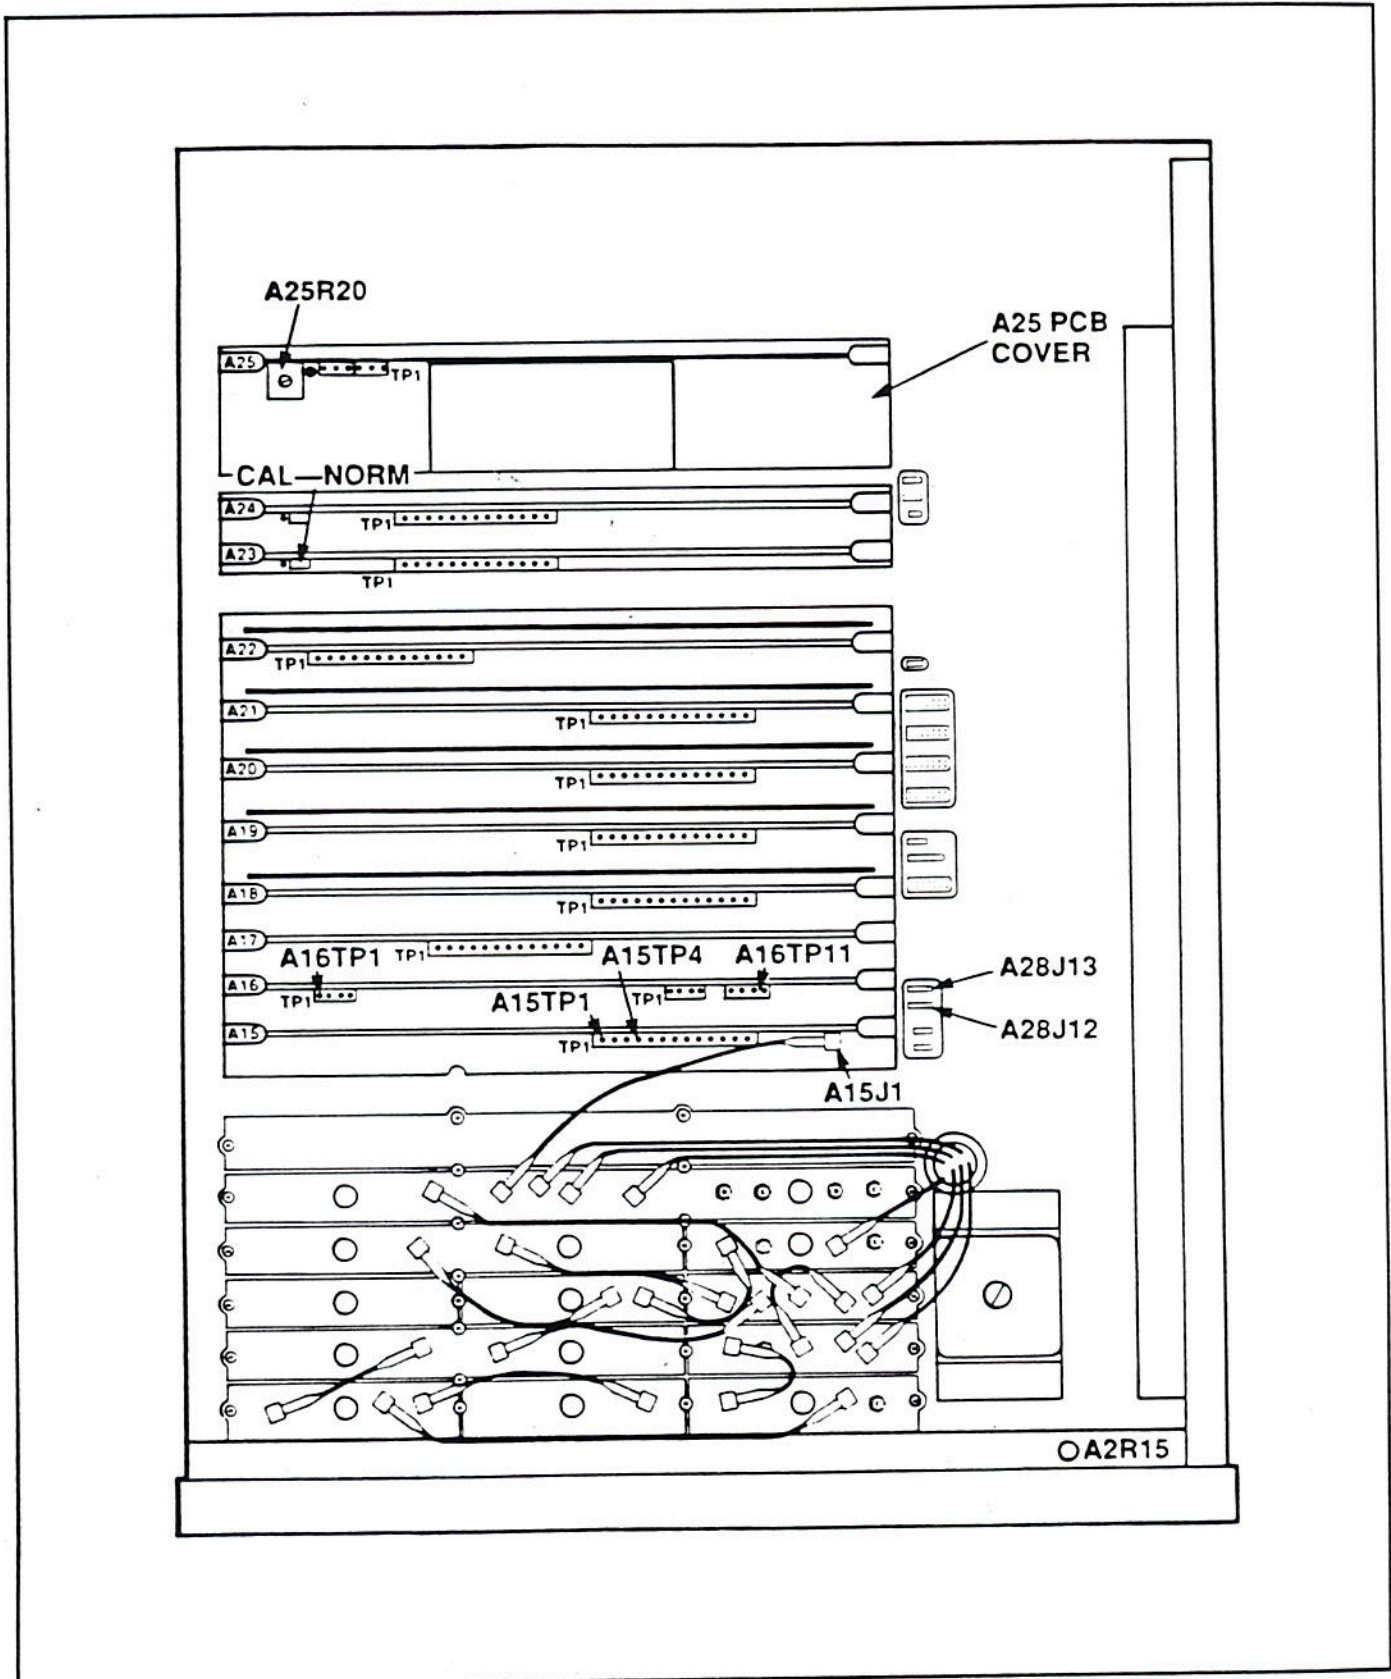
Top View of 67XXA showing RF Casting Connectors, Motherboard Connectors, and PCB Test Points
